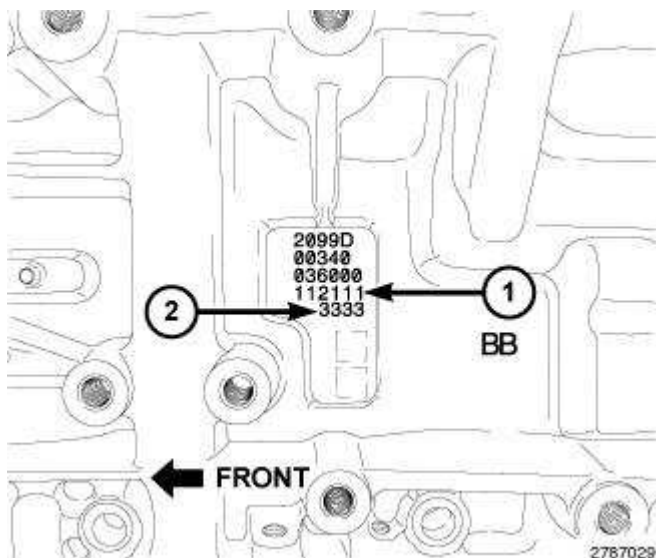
Engine Block Cylinder Bore Diameter Grade Markings & Engine Block Main Bearing Journal Diameter Grade Markings
